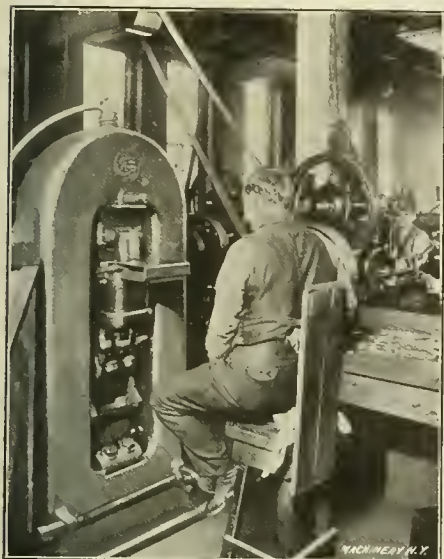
Beveling the Corners of Side Pieces in Coining Press
